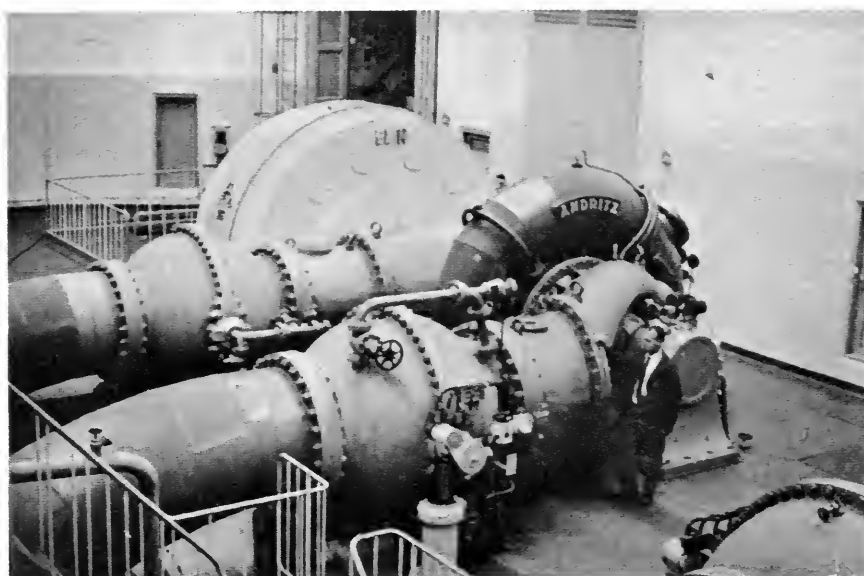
(G4-17) Pump and Motor showing Intake Valves
